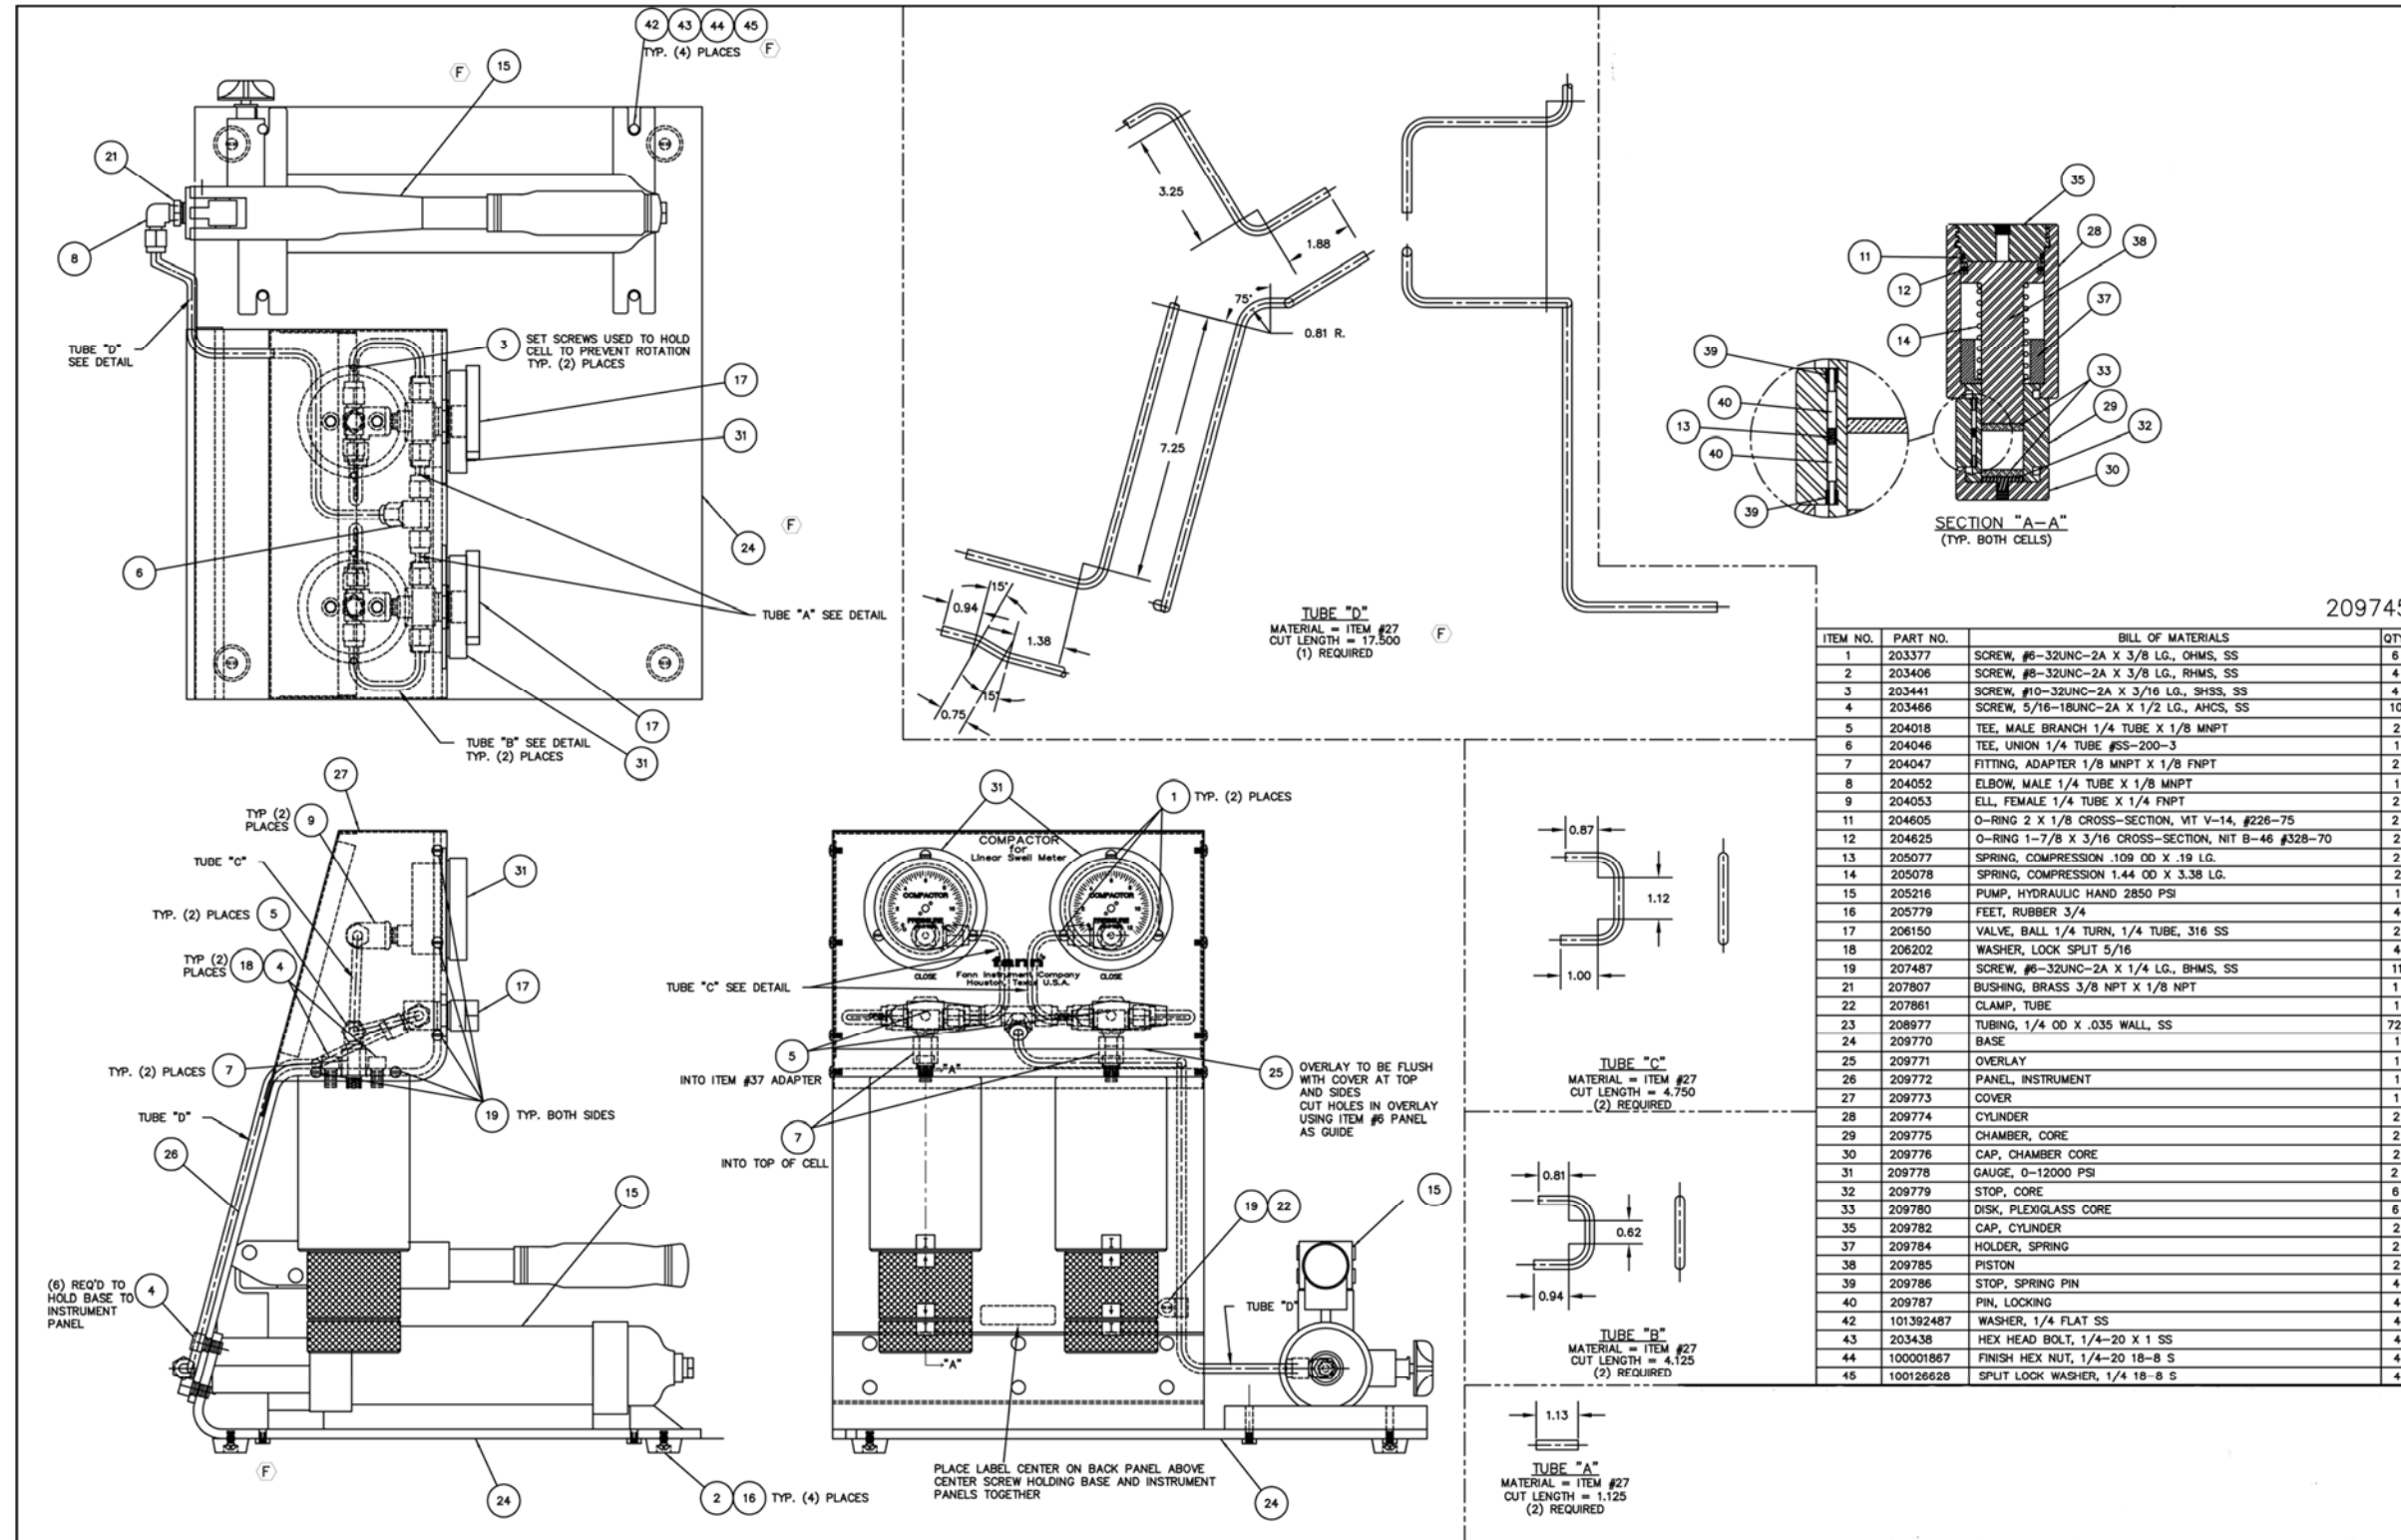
Mechanical Assembly, Compactor, 2 Head
